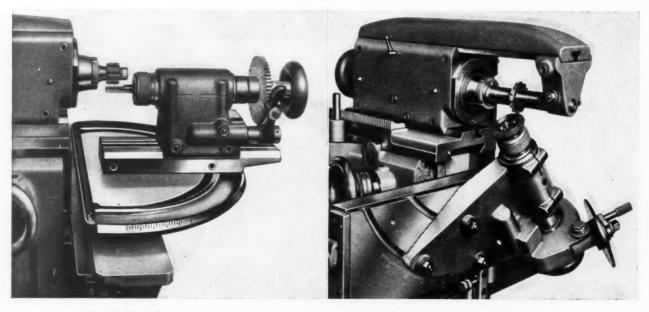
(Left) Semicircular table attachment with saddle for Schaublin precision milling machine. (Right) Inclinable quill-holder, which is interchangeable with saddle and semicircular table
